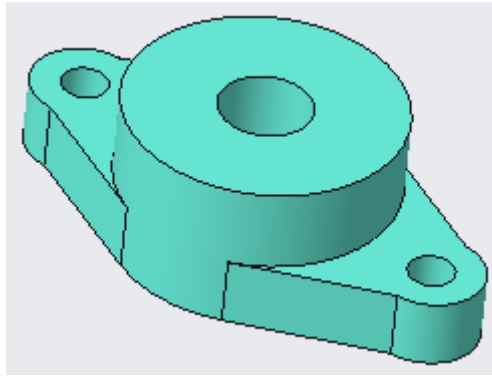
CREO representation of the 2 bolt flange 20mm internal diameter bearing
